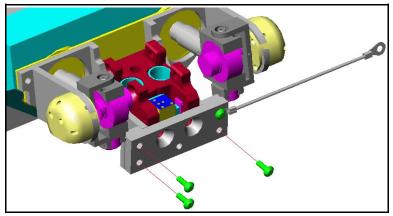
Lower Abdomen to Rear Attachment Plate
